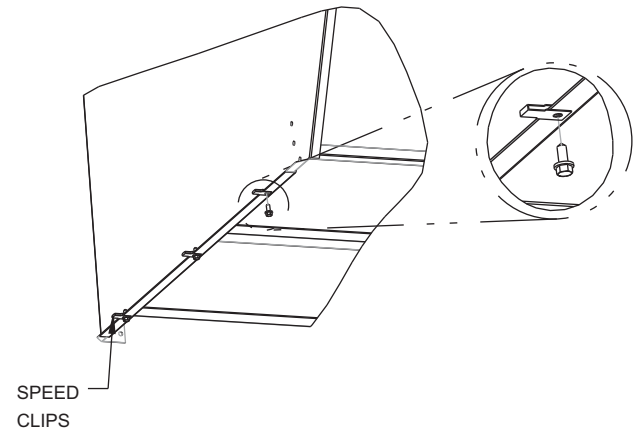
Bottom Filters Installed with Flange Pointing Down (Speed Clip Location)
